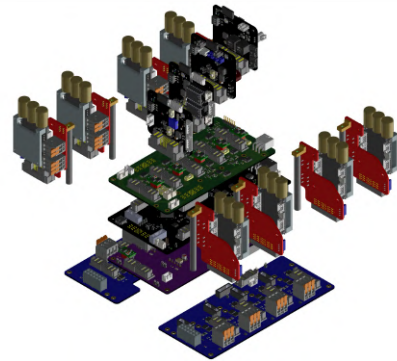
3D view of BBAUV 5.0 Electrical Stack (Exploded View).
